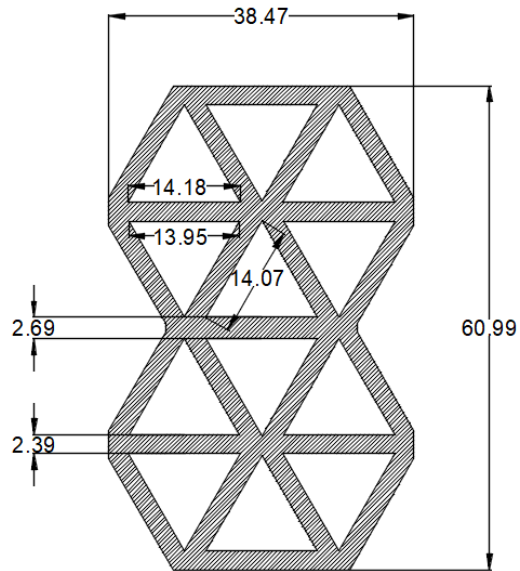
Toucan Beak IV cross-section with dimensions in mm.
